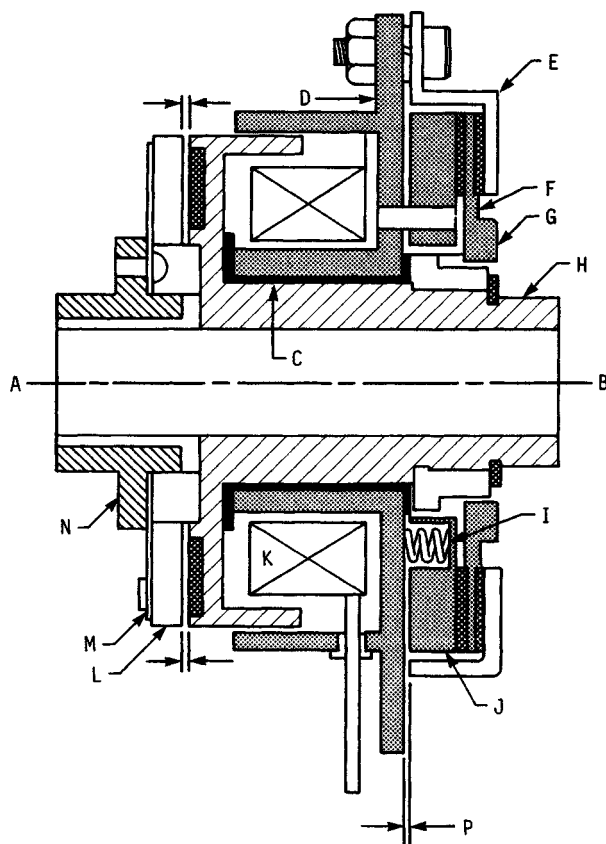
Clutch-brake transmission. *A*, input; *B*, output; *C*, field coil bearing; *D*, field coil assembly; *E*, pressure cup; *F*, brake plate; *G*, hub spring; *H*, rotor assembly; *I*, brake spring; *J*, brake armature; *K*, field coil; *L*, clutch armature; *M*, clutch spring; *N*, drive plate; *P*, air gap. (Electroid Corporation.)
